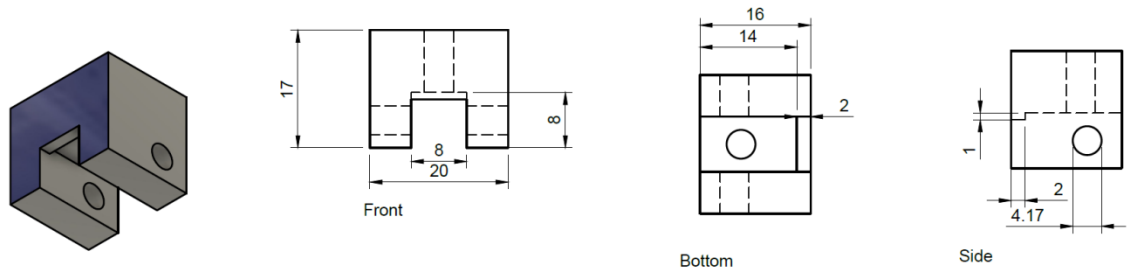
Dimensions of prism clamp from three directions. The sides are mirrored and the holes taped with 8-32 machine threading. All of the dimensions are in millimeter (mm).
